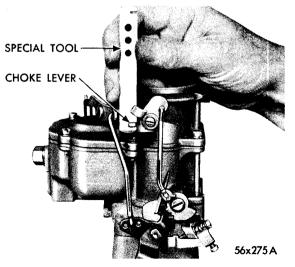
Bending Choke Lever for Correct Fast Idle Cam Setting
